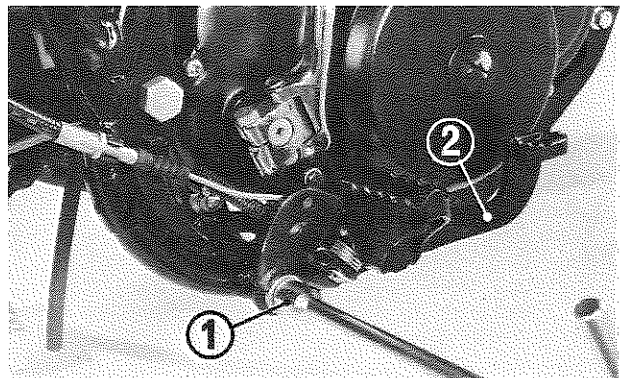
(1) Brake pivot shaft (2) Rear brake pedal
